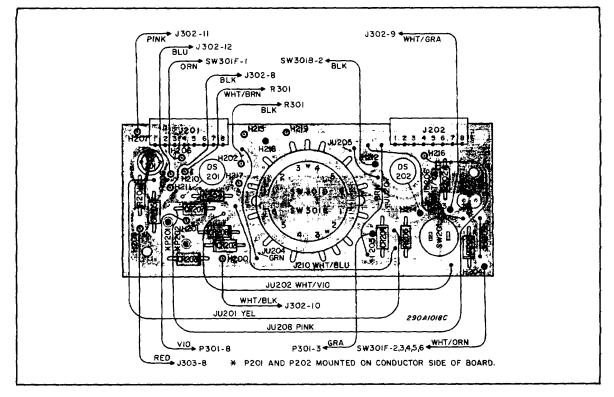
Siren Module Front Circuit Board Parts Location Diagram.
